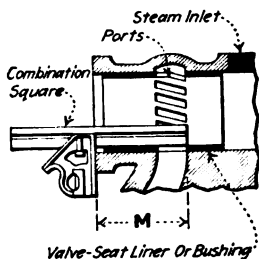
First adjustment of square—blade end against inner edge of steam port.
